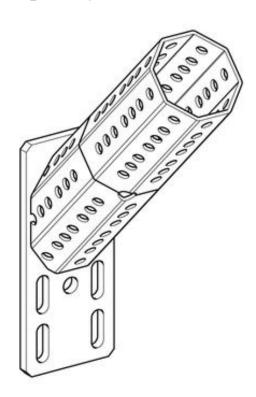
example of a standard connection used for the connection of bracings to beams and columns. STA F 80 45 (source: sikla.at)
